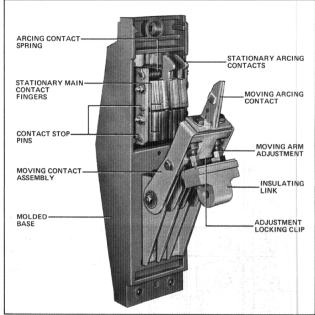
Type DS-532 Pole Unit Assembly - Front View
